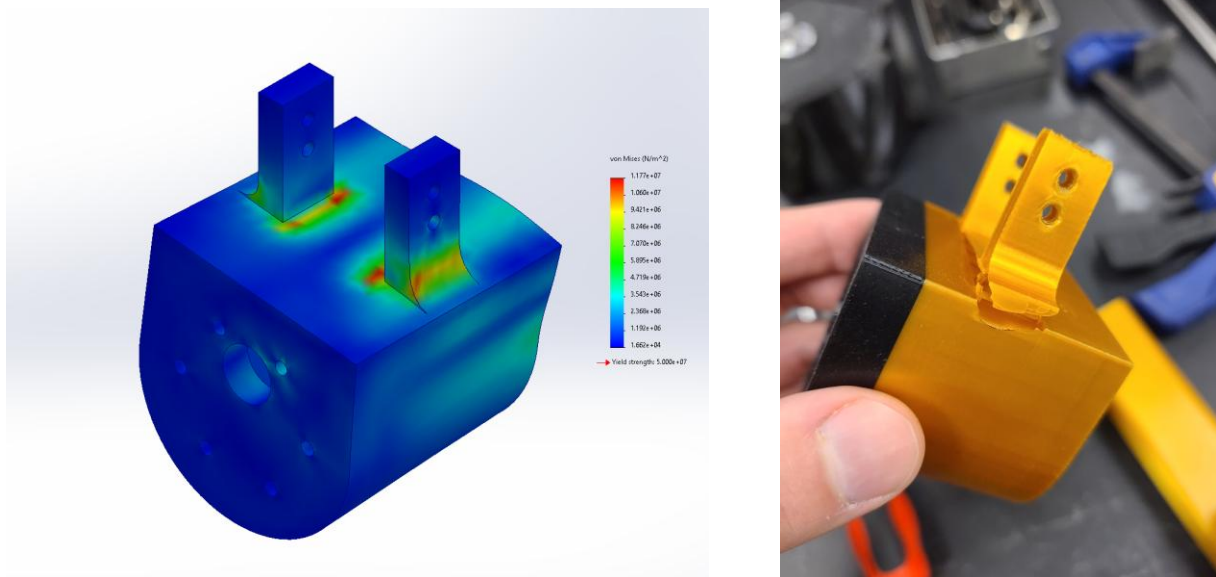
a) Location of Motor Mount Failure Mode from FEA, b) Part Failure During Testing
